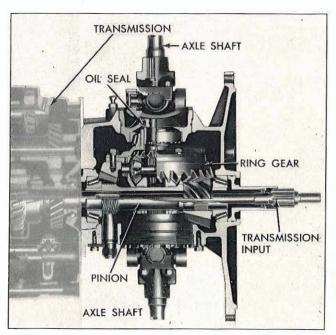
Rear Axle Cross-Section Top View With 3-Speed Transmission
